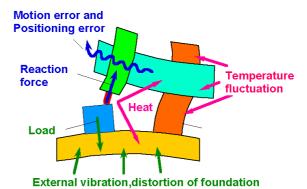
Various causes of relative positioning error between tool and workpiece for conventional machine
